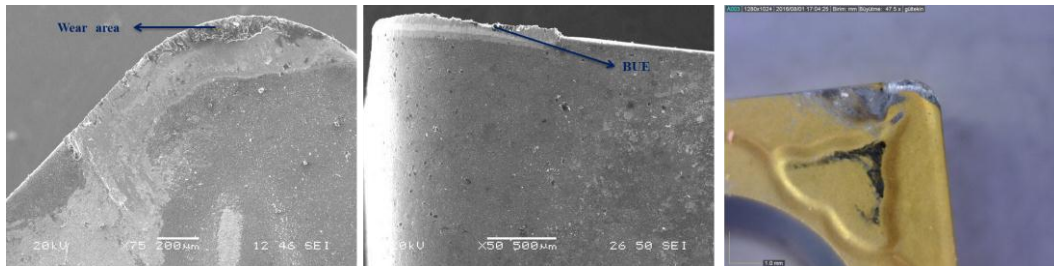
Cutting tool image of the Experiment No. 6 conducted using the breaker
